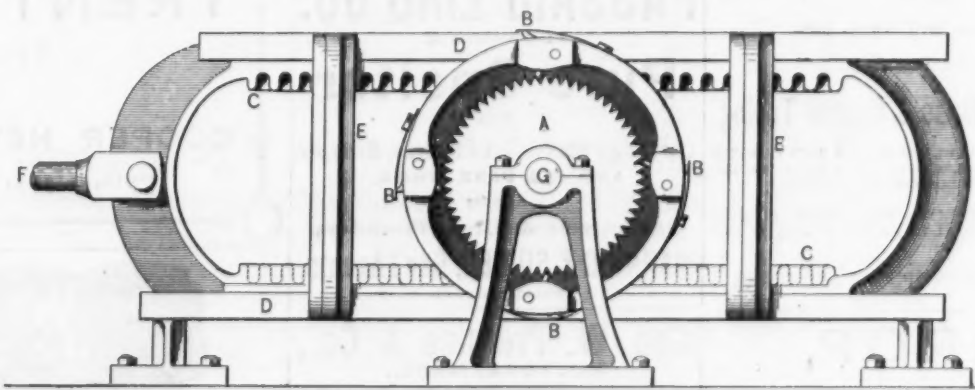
Enlarged View of Rack and Dog Disks, Transmitting Power to the Shaft.
